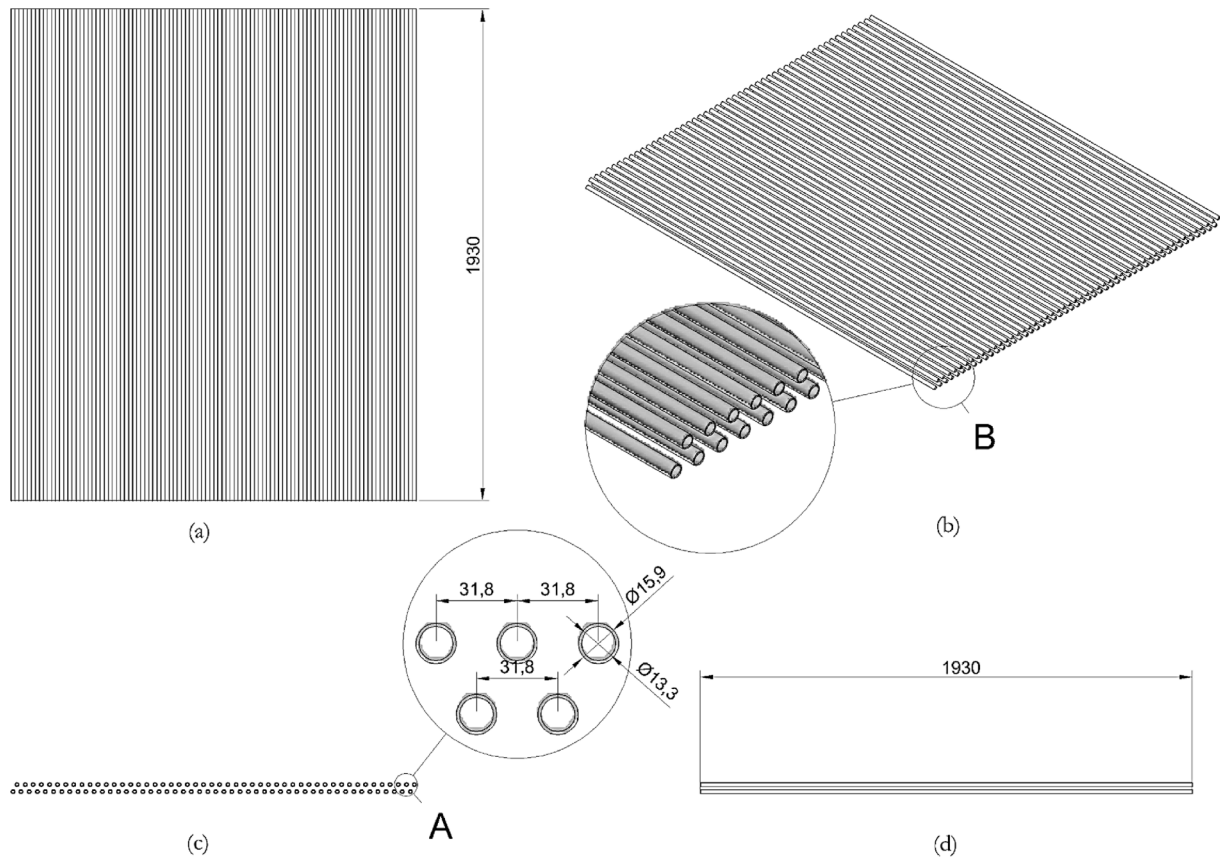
Multi-view drawing of SHX: (a) top view; (b) isometric view; (c) front view; (d) side view.
